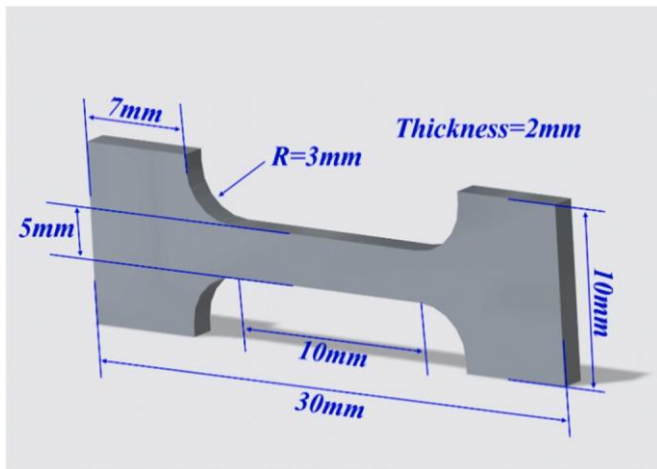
Shape and dimensions (units: mm) of tensile samples.
